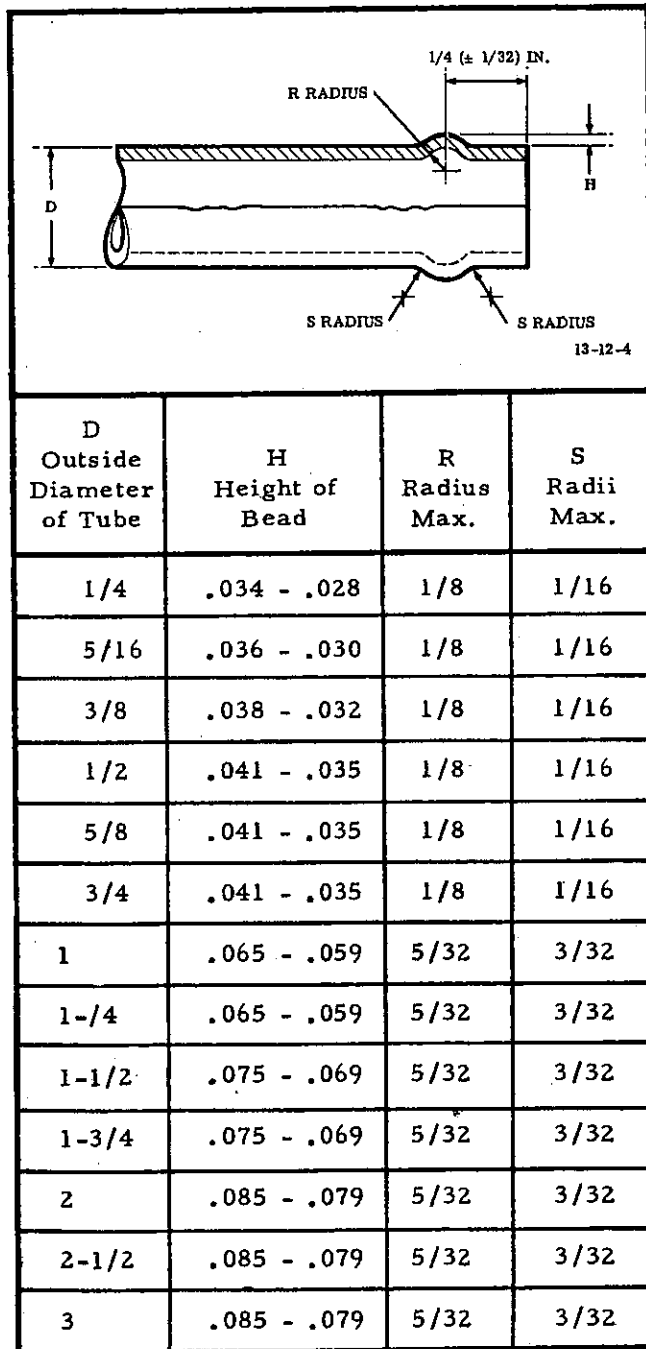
Dimensions of Rigid Tubing Hose Connection Beads
